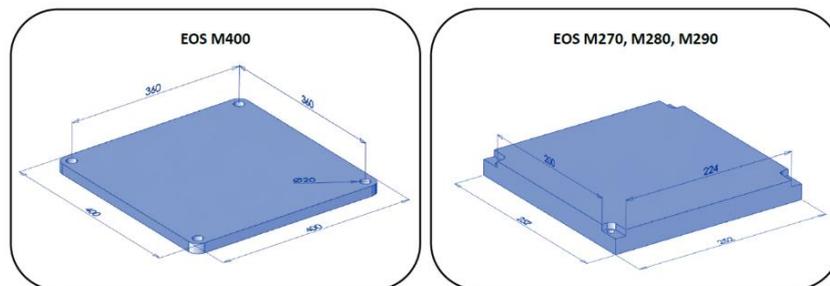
Build platform dimensions of the various EOS DMLS machines in use at 3T-am.
